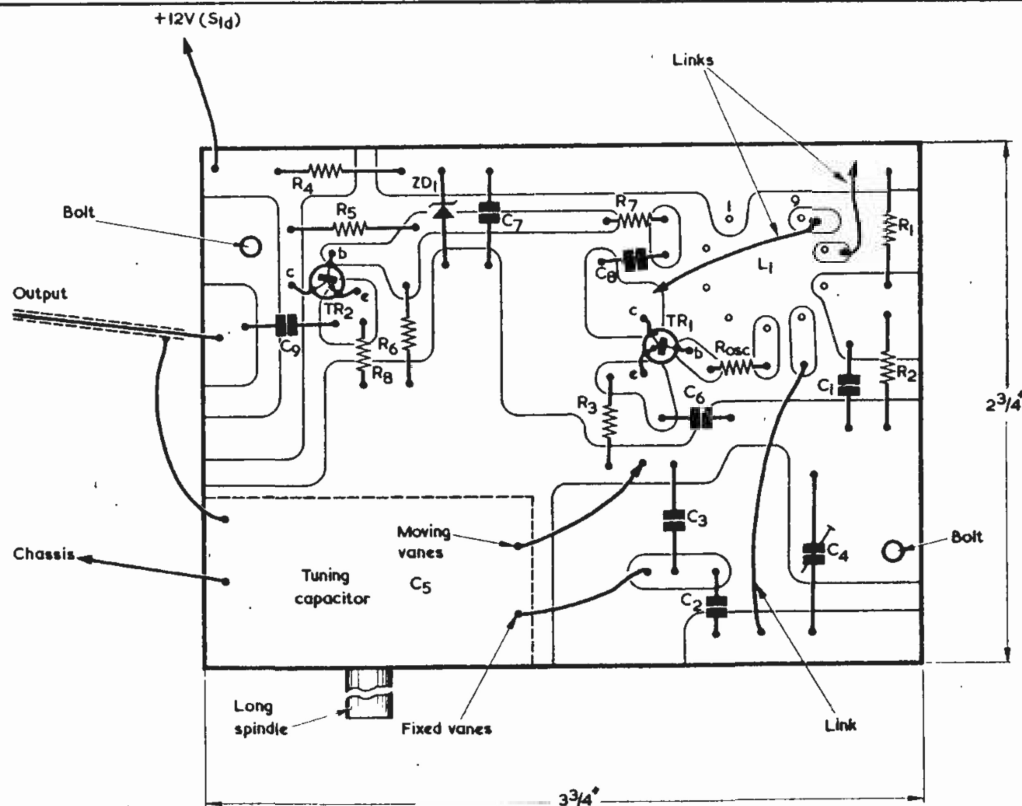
The layout of the v.f.o. printed circuit board. This view is with the components towards the reader
